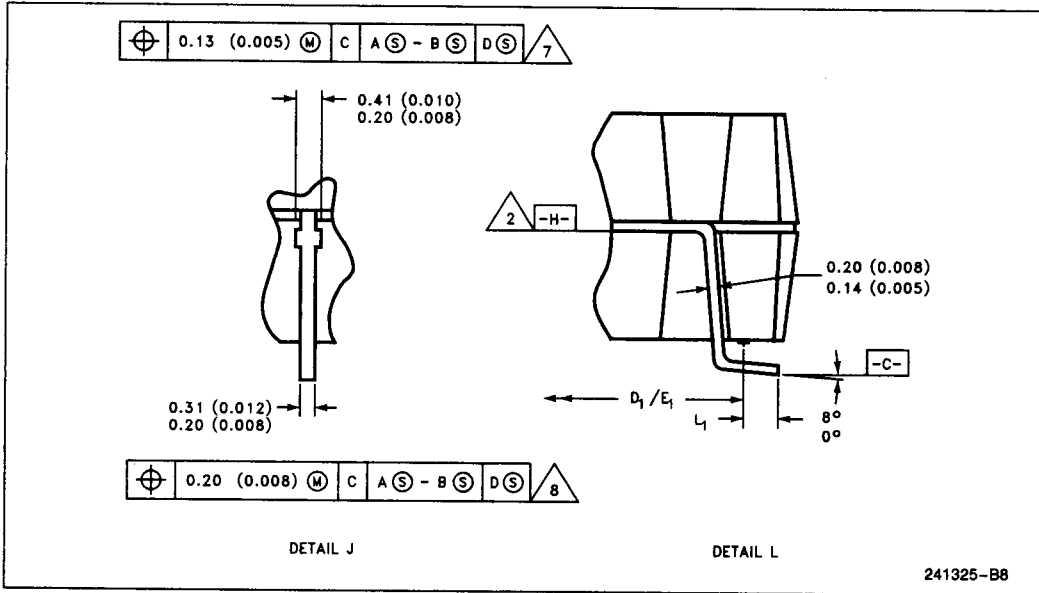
196-Lead PQFP Mechanical Package Detail—Typical Lead
